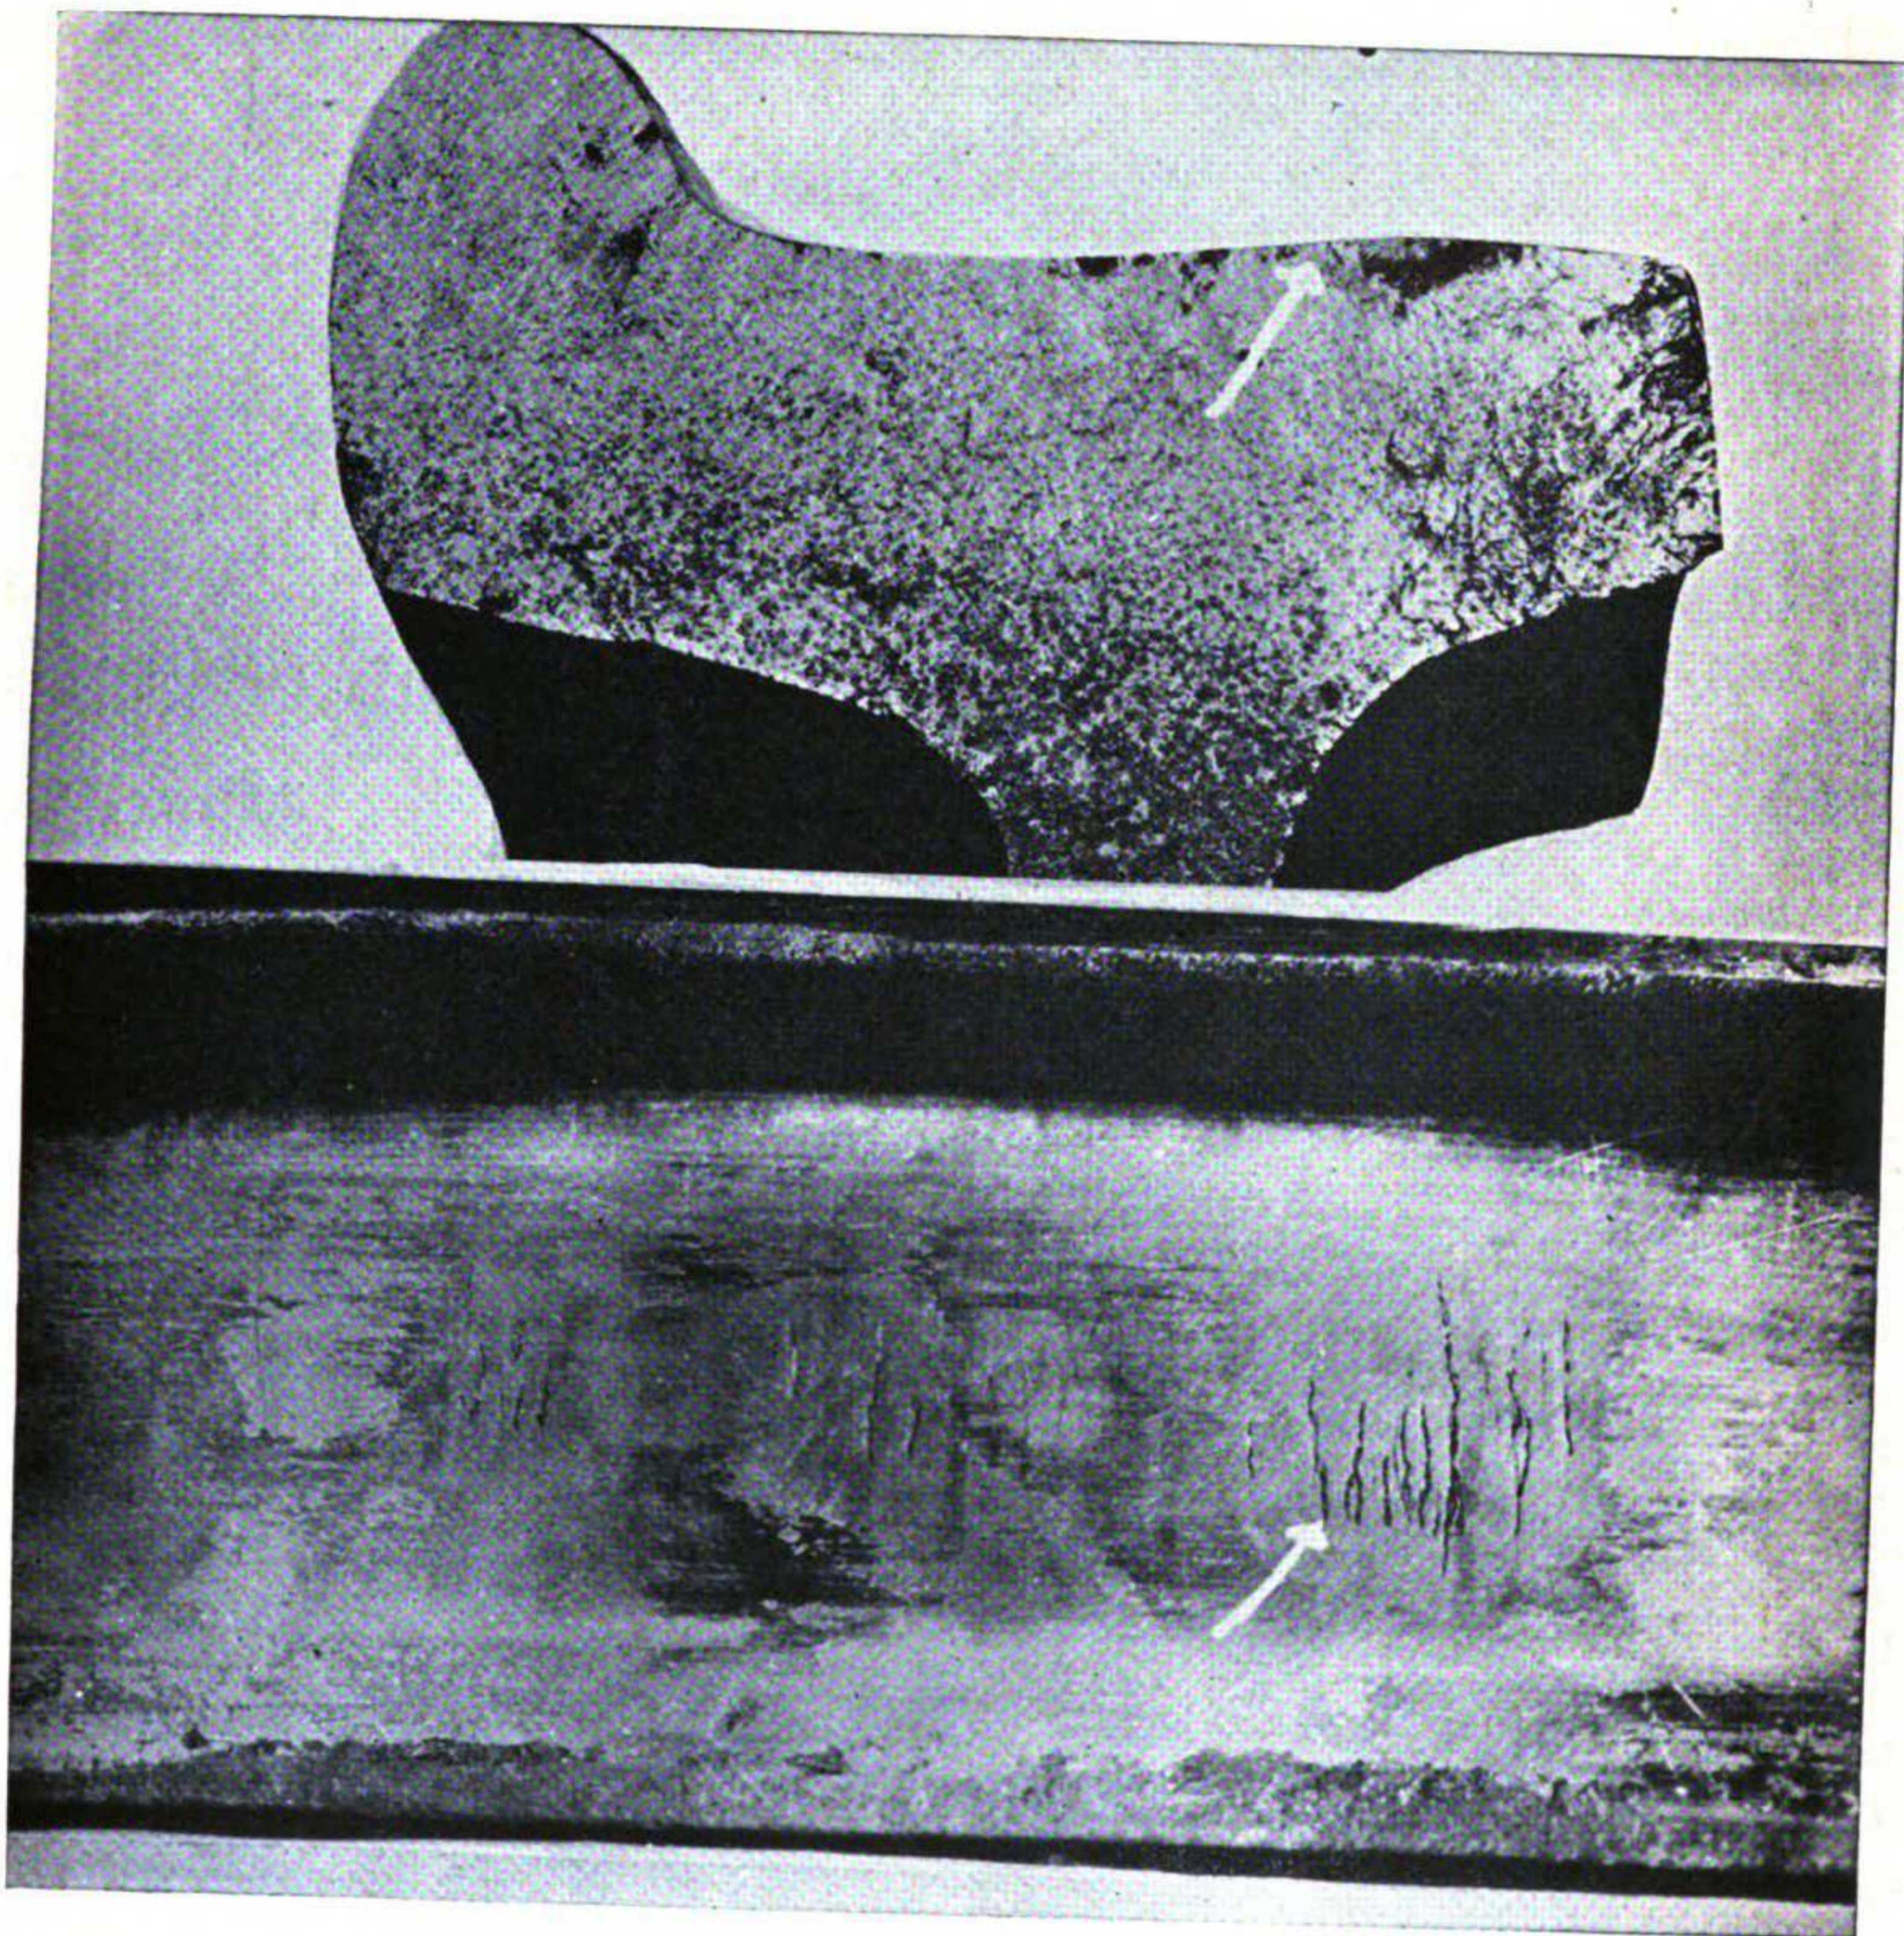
Brake burn cracks, cast-iron wheels. Noncondemnable.
